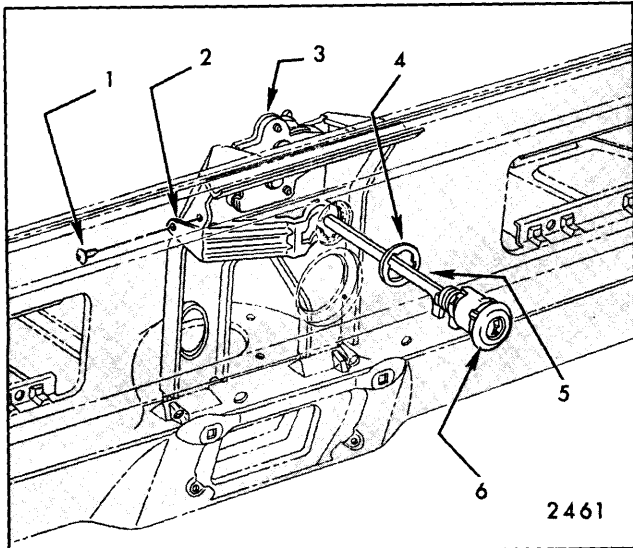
Typical Rear Compartment Lid Lock Cylinder Installation (Side Load)
